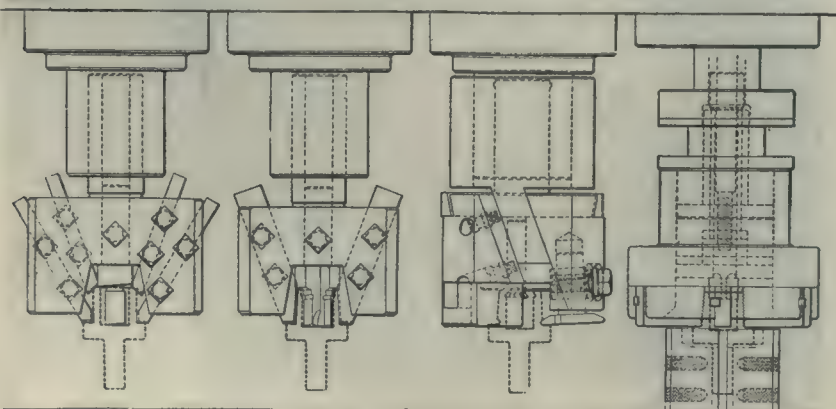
TOOL LAYOUT FOR MACHINING TIME FUSE BODIES—FIRST OPERATION.
